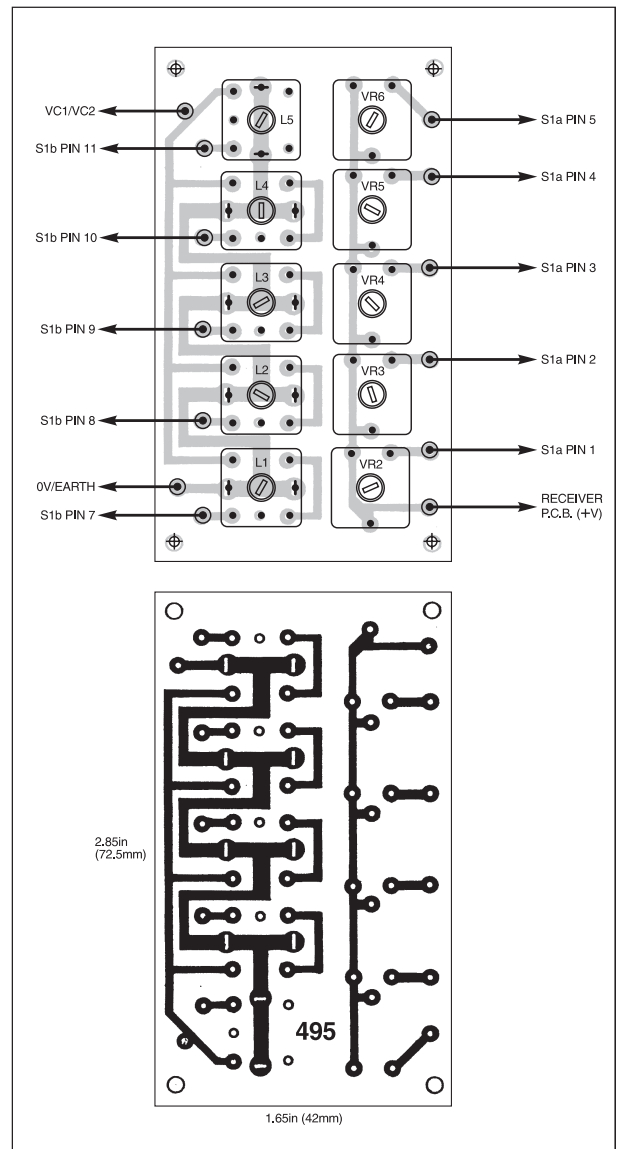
Printed circuit board component layout wiring details and full-sized foil master for the Coil Pack
